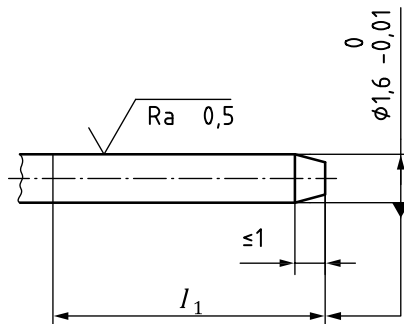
Dimensions, tolerances and surface roughness for Type 3 shank
